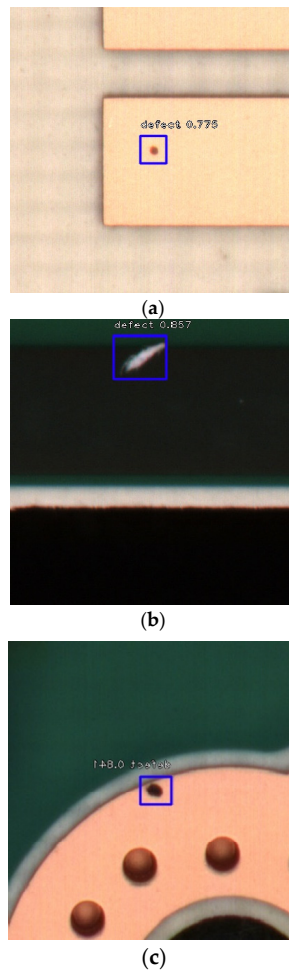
True positive PCB sections: (a) True positive PCB sample 1. (b) True positive PCB sample 2. (c) True positive PCB sample 3.
